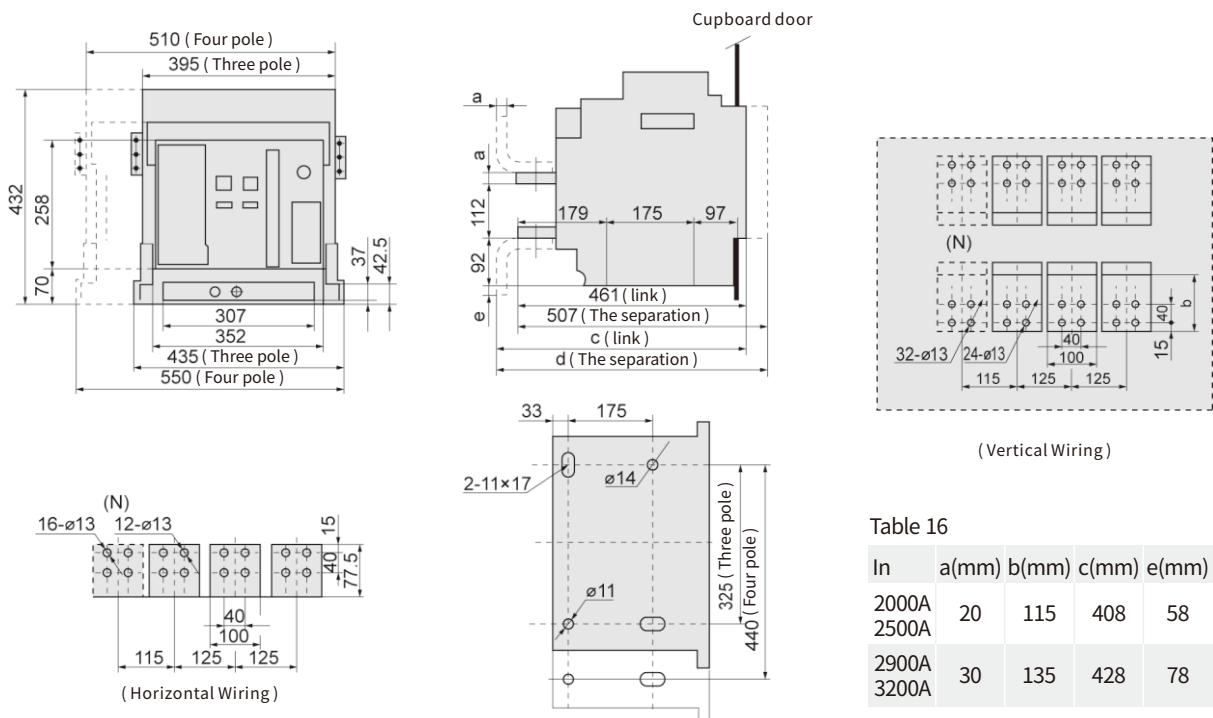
Outline and installation dimensions of drawout type circuit breaker (EKA1-3200, 3200/4)
